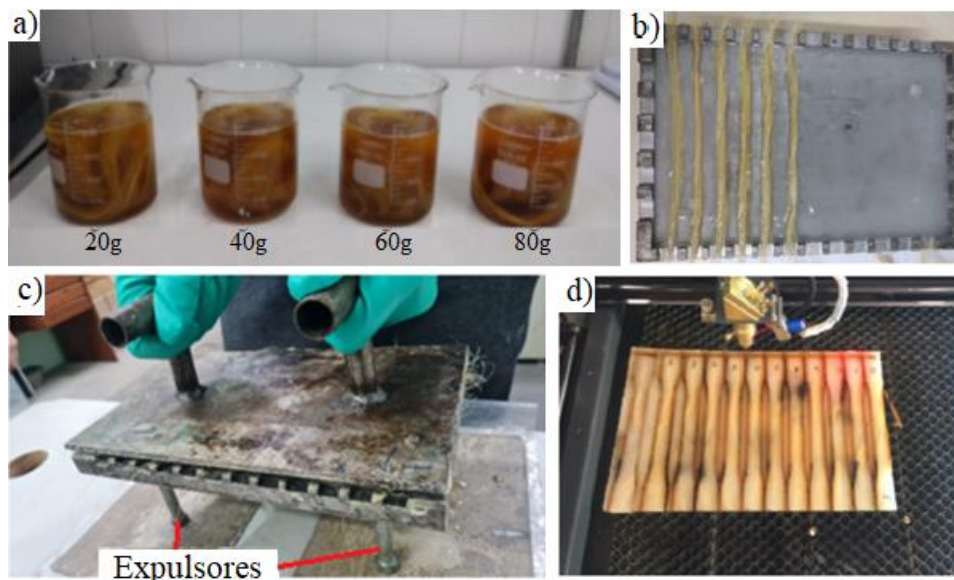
Manufacturing sheets process: a) chemical treatment of the fibers, b) fibers and resin placement inside mold, c) closing the mold, d) specimens laser cutting.
